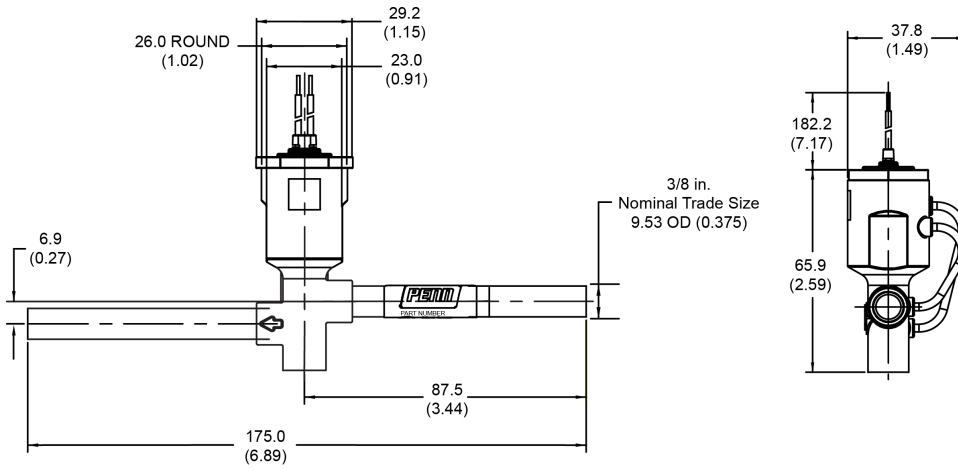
QREV06-QREV08 type valve dimensions, mm (in.)
